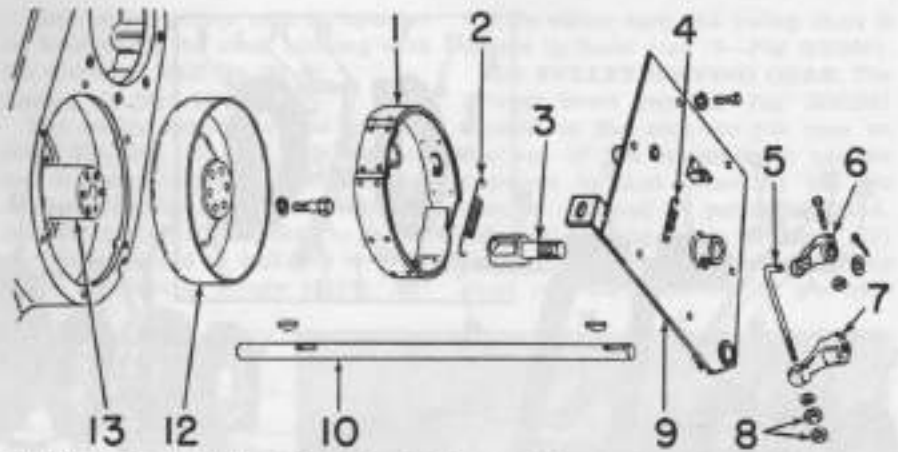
Exploded view of band type brake assembly as used on all models equipped with band brakes except 55, 55D, 55K, 55LP, 201, 202, 203 and 203G.
